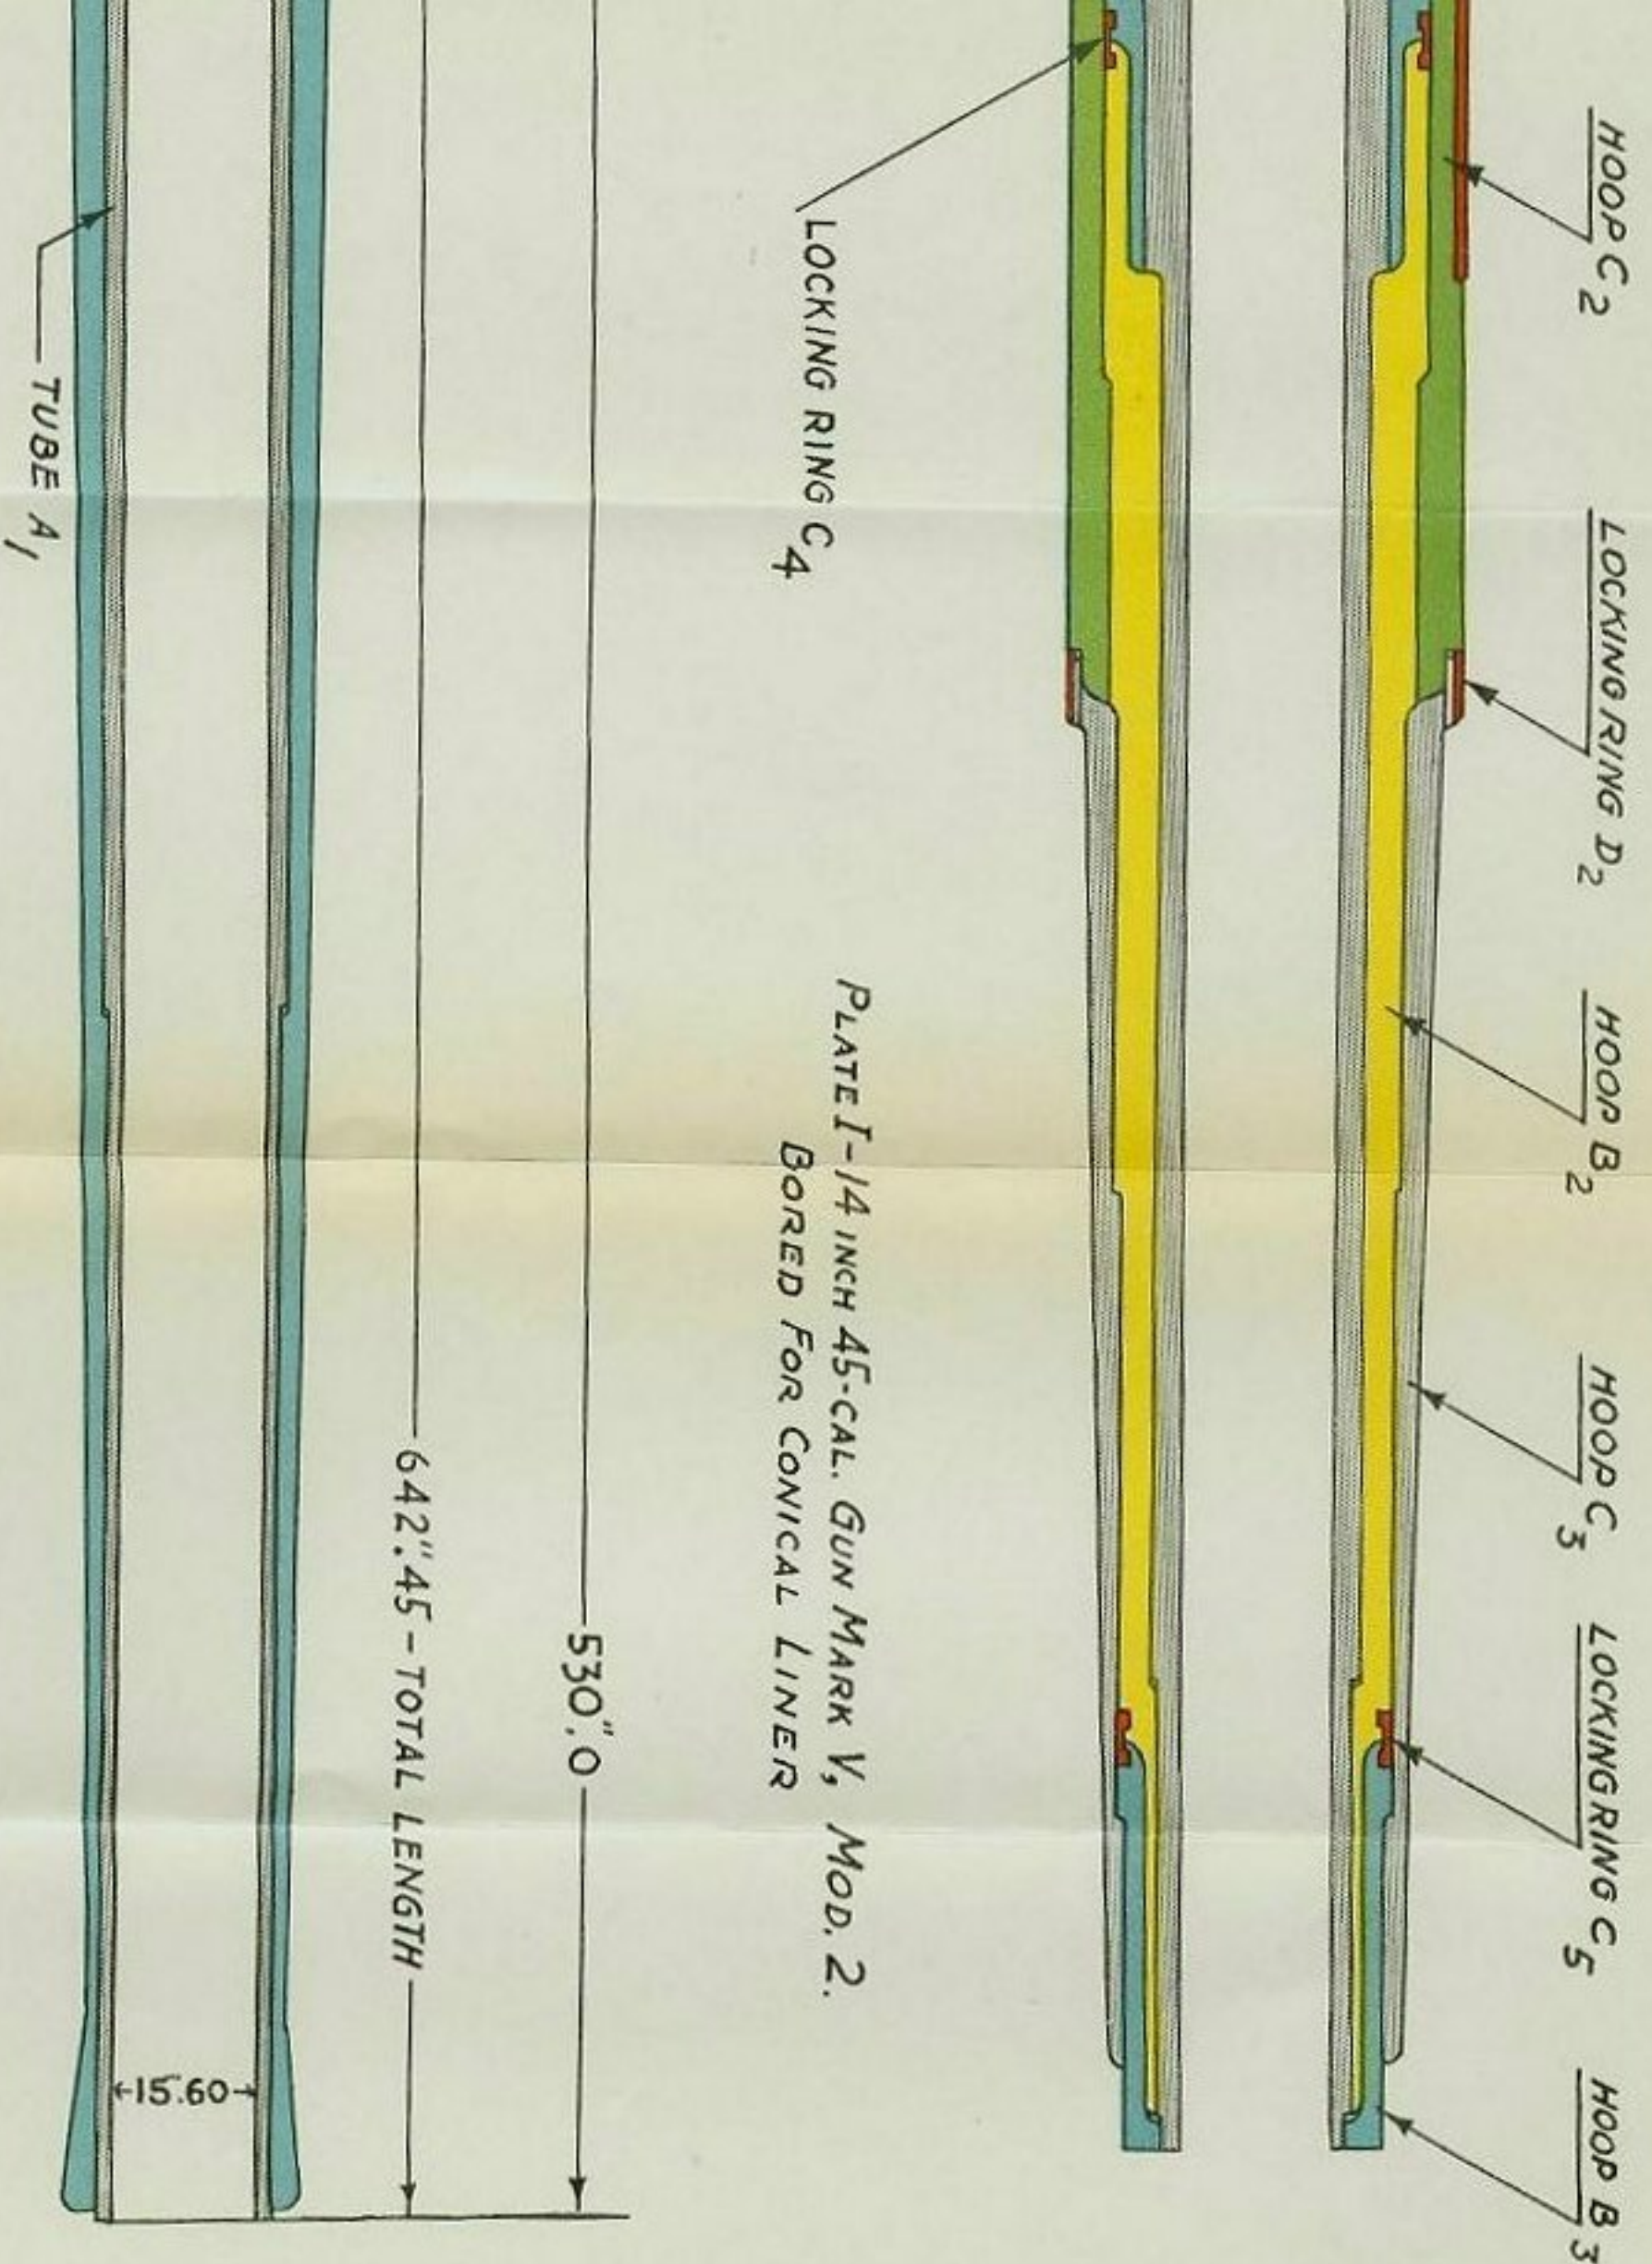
INCH 45-CAL. GUN MARK V, MOD. 2.
